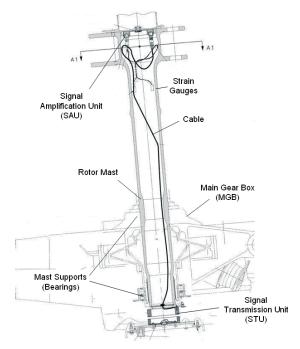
Rotor mast and transmission with installed Mast Moment Measurement System (MMS) in sectional view.
